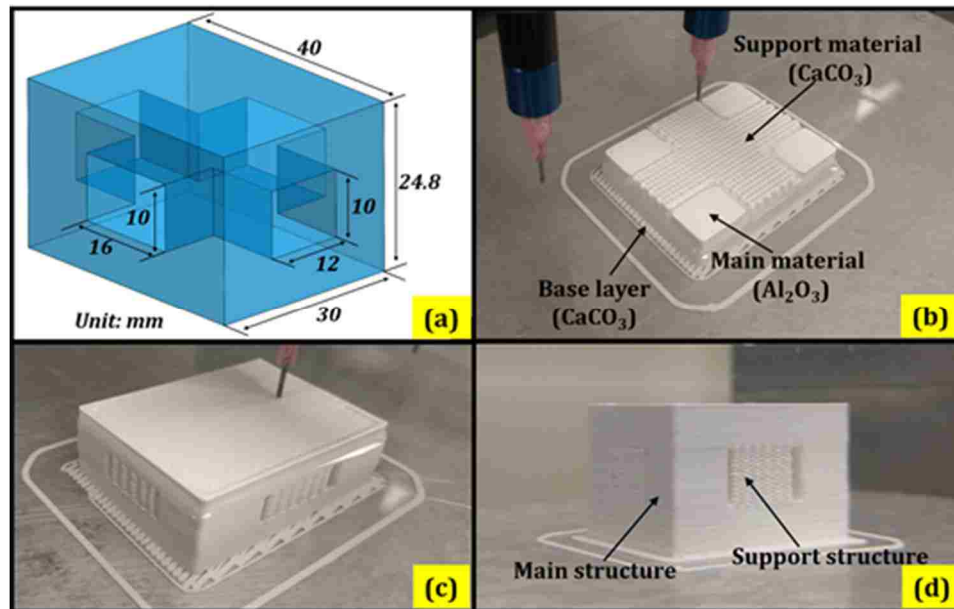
The cuboid part with rectangular holes: (a) CAD model, (b)(c) Part being printed, (d) Part printed completely and surrounded by oil.
